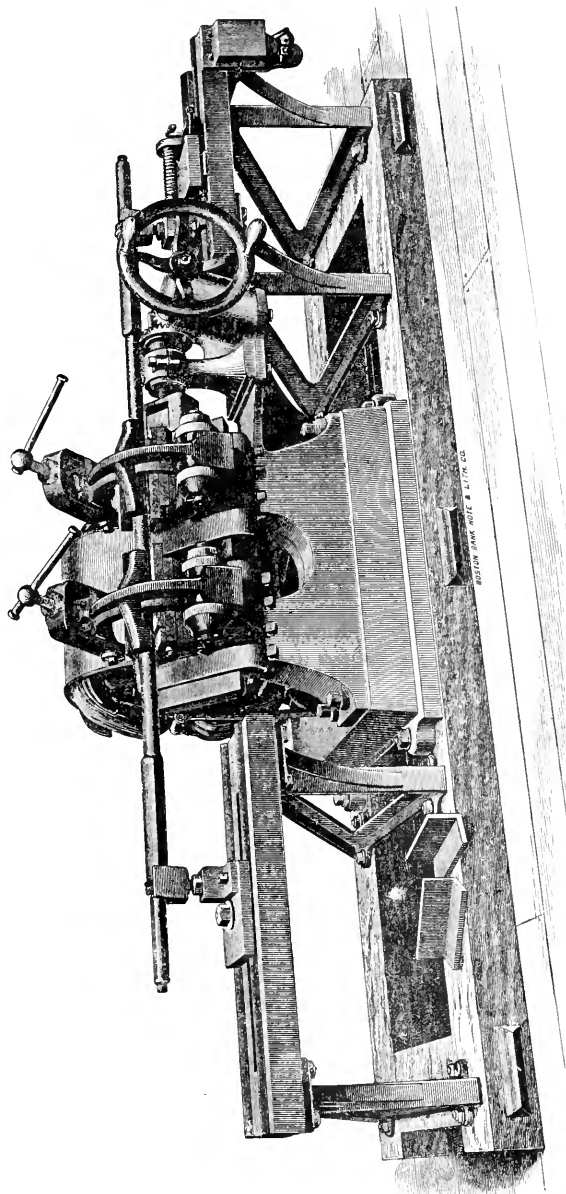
CARRIAGE-AXLE WELDER.
